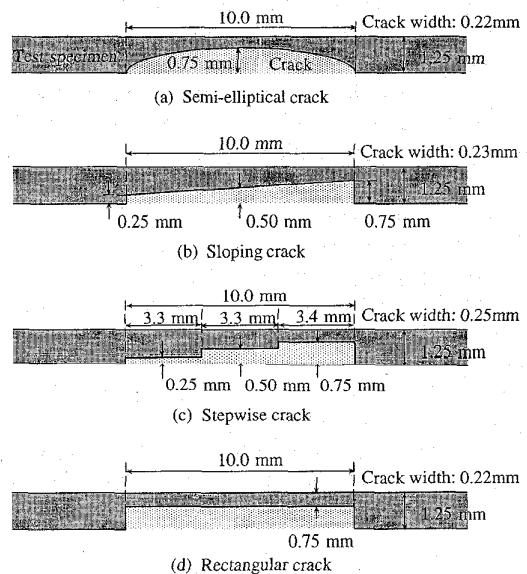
Geometries and dimensions of tight cracks. Four different cracks were made by using electric discharge machining.
